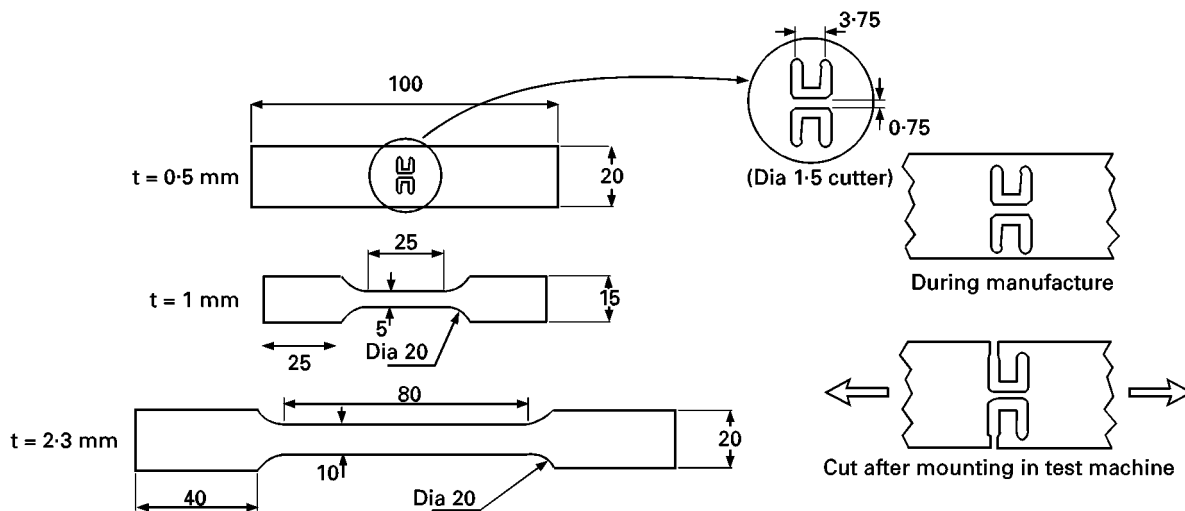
Nominal sizes for large, medium and small specimens (all dimensions in mm).
